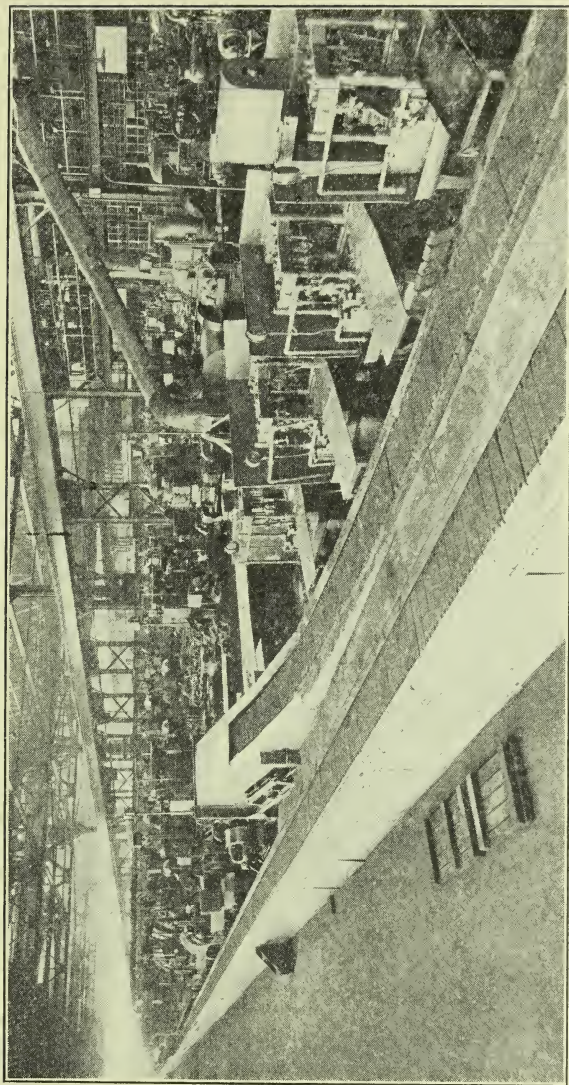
GENERAL VIEW OF THE CYLINDER MACHINE SHOP
